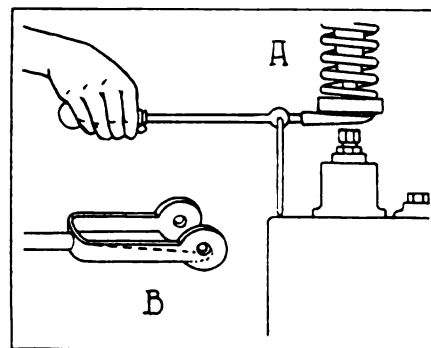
A Simple Valve Tool Made of a Discarded Part.
